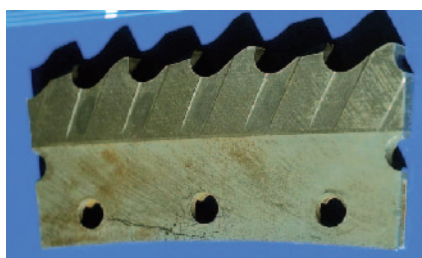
Segment of a cold saw of high speed steel EB-welded to carbon steel in annealed condition. This saves 50% of the expensive high-speed steel (Reproduced courtesy: Probeam)
